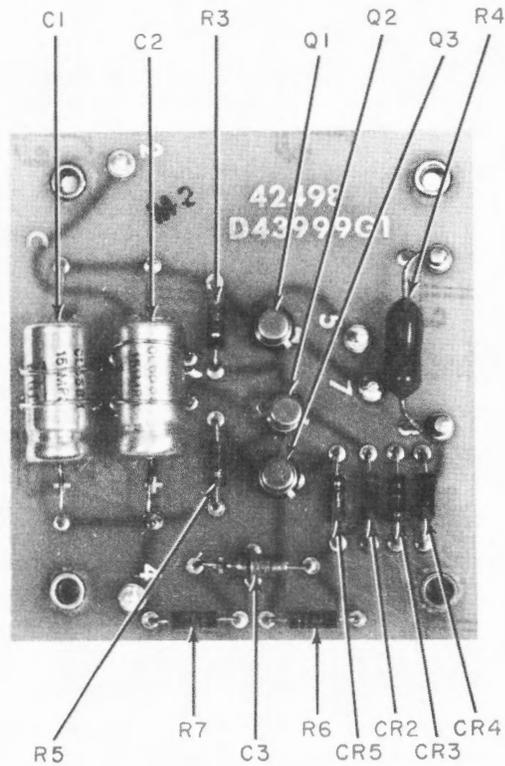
18 Volt Regulator A1, Part of Power Supply PS1, Parts Location
